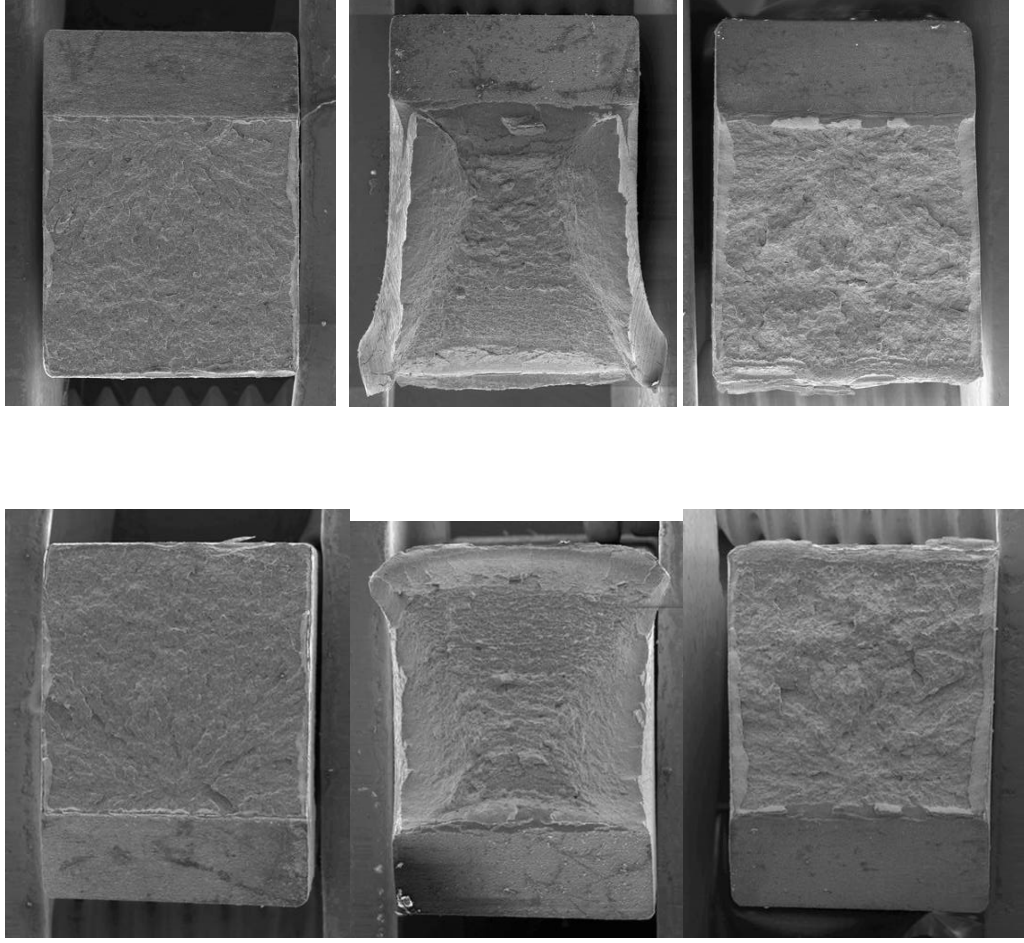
Tested impact specimens E2 01, E2 02, E2 03 after testing (Macro) and after complete breaking (SEM)
